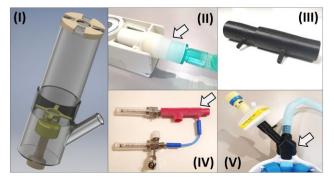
Examples of 3D printed components produced by means of AM technologies for the COVID-19 pandemic. See [9] for further details on design and manufacturing.
